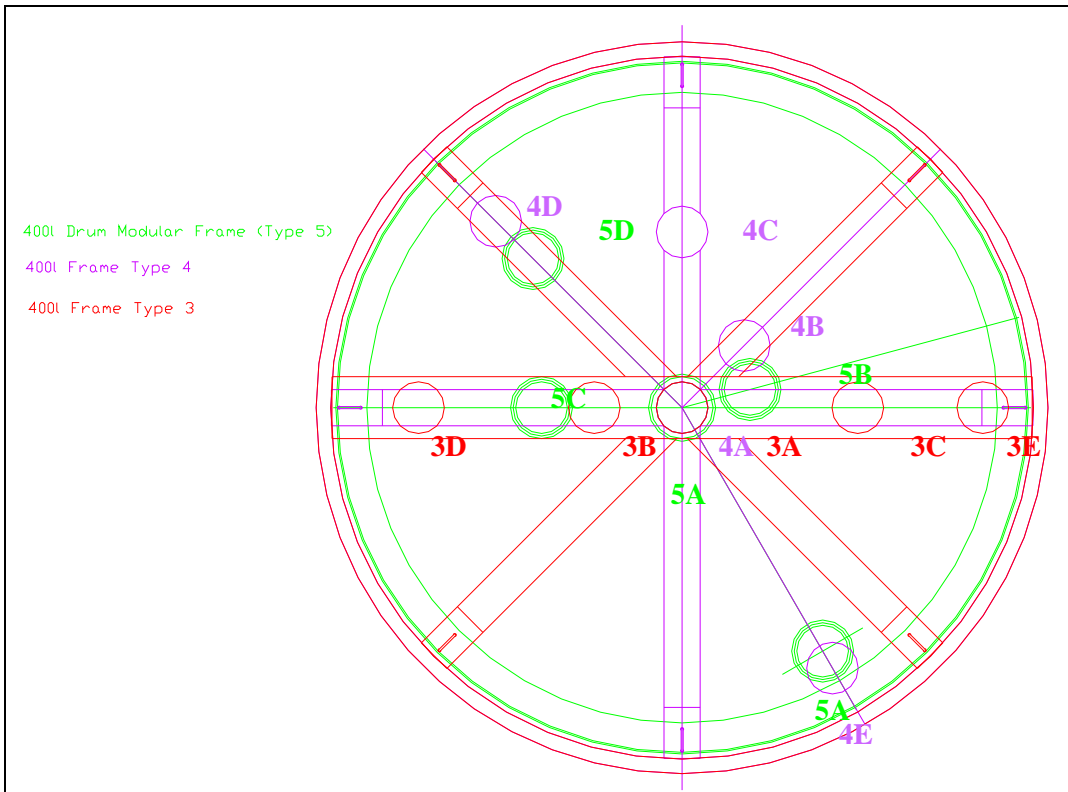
Plan view of the 400 litre drums and puck carrier frame types.
